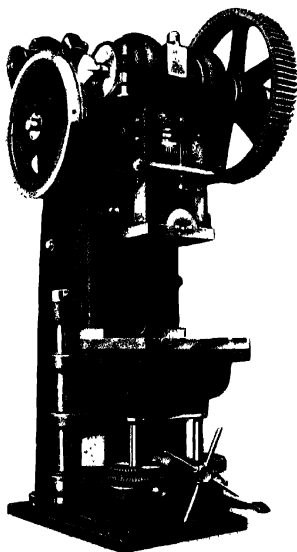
Large horning press with heavy swivel table. (Rhodes)
